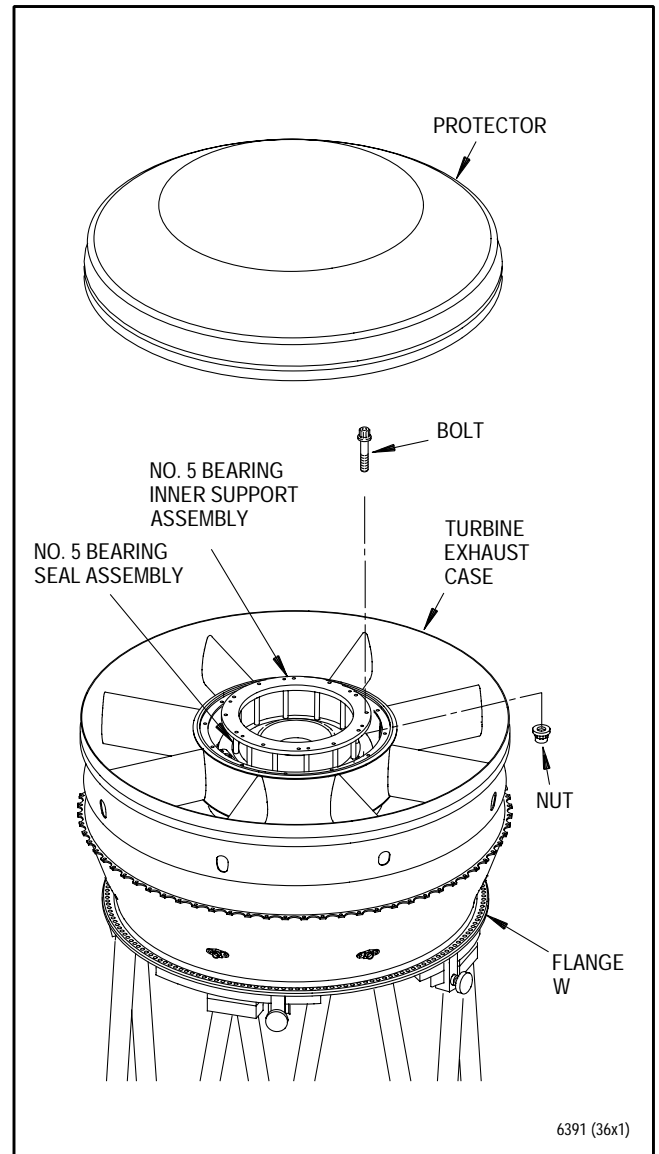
No. 5 Bearing Inner Support Assembly - Removal (Sheet 1 of 3)
